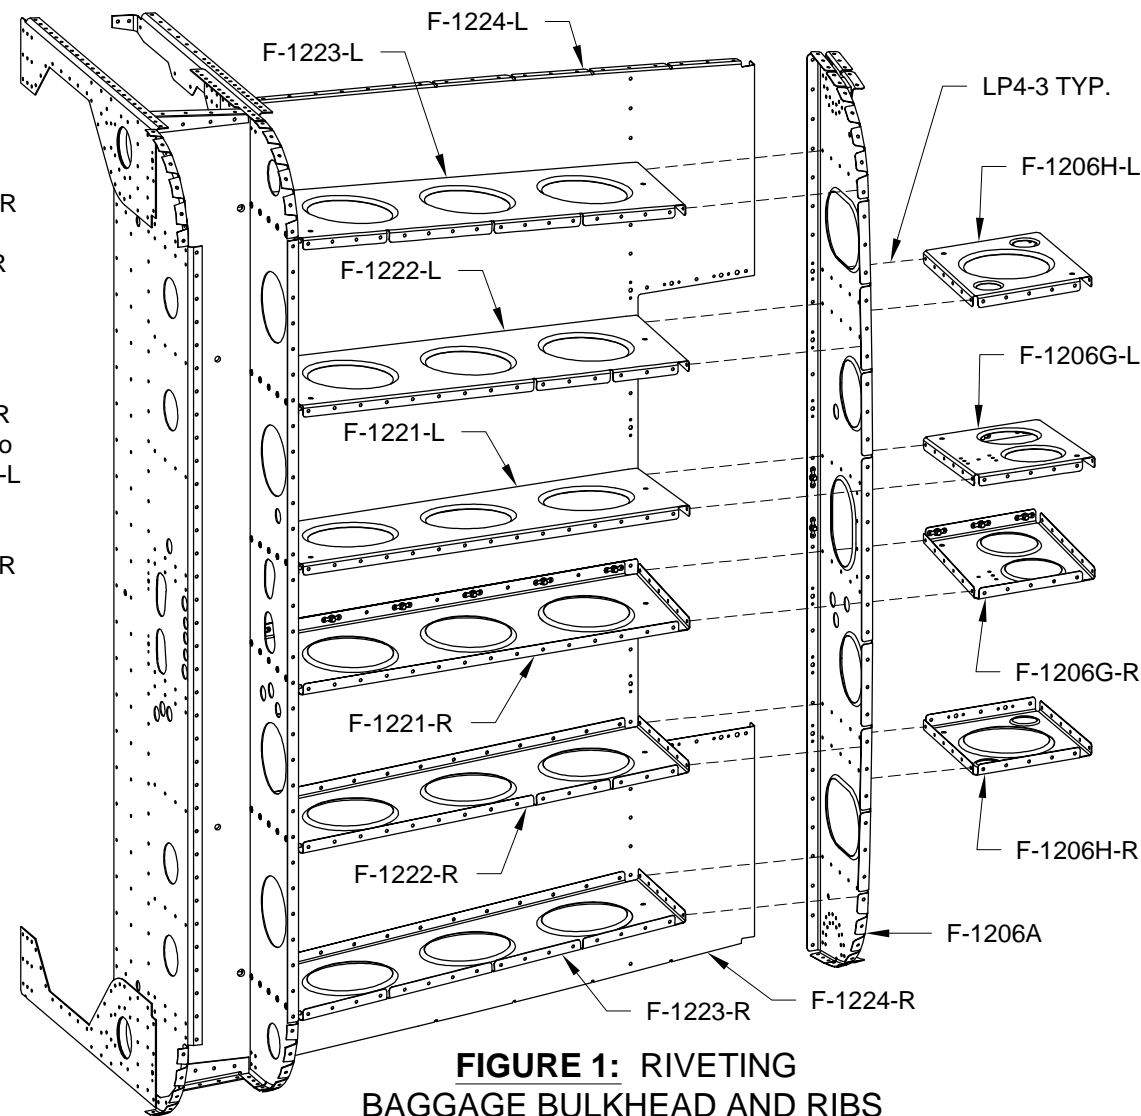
RIVETING BAGGAGE BULKHEAD AND RIBS
